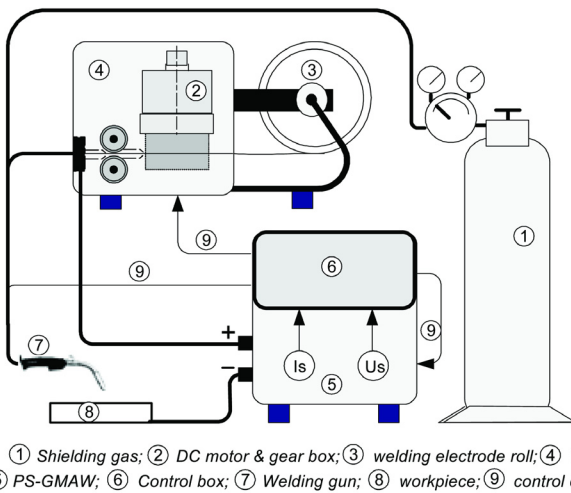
Configuration of fundamental equipments necessary for GMAW system: (1) shielding gas; (2) DC motor and gear box; (3) welding electrode roll; (4) WFU; (5) PS-GMAW; (6) control box; (7) welding gun; (8) workpiece; (9) control cable
